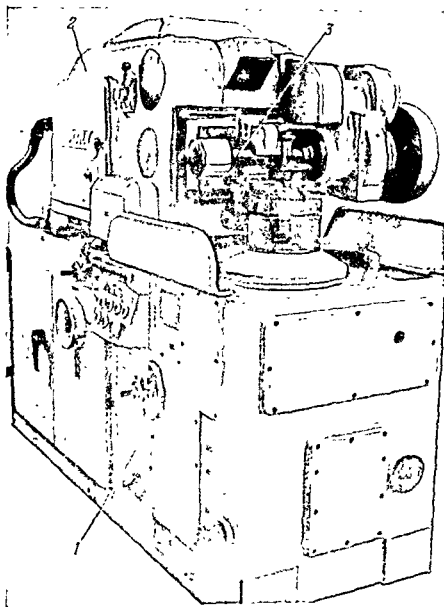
Semiautomatic gear-tooth rounding machine, model 5B580.
